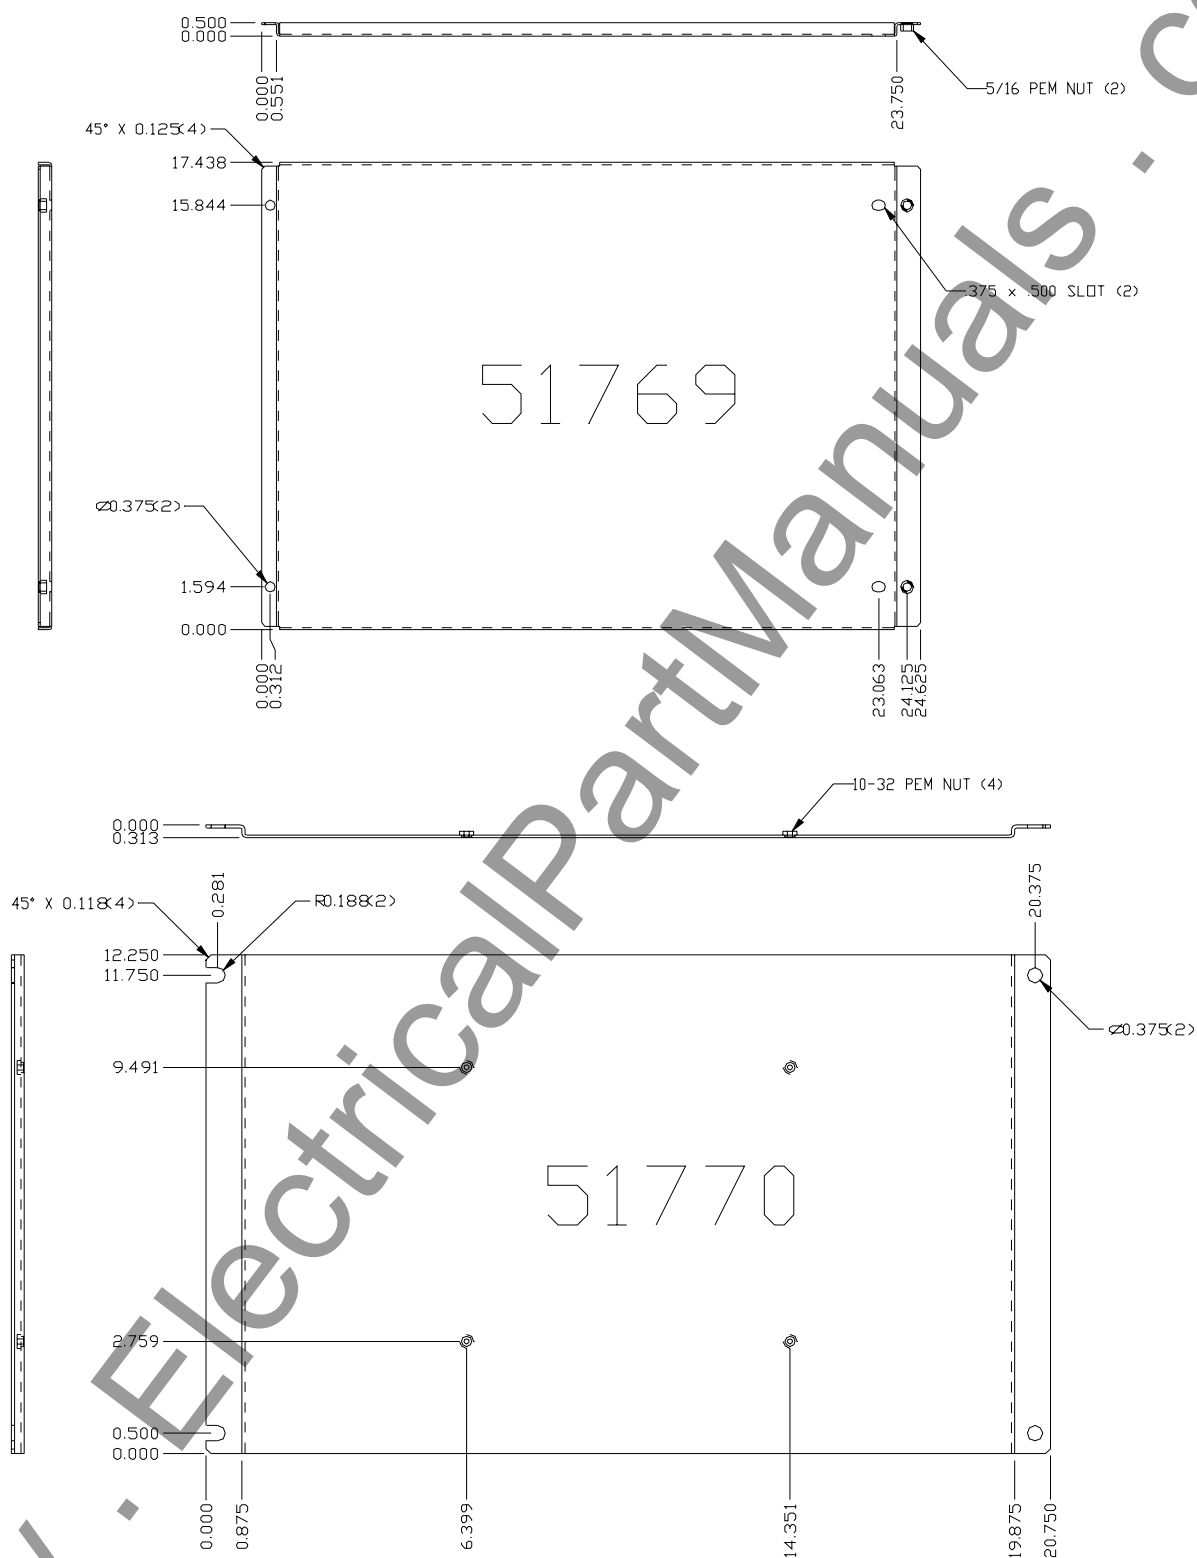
51769 and 51770 adapter mounting plate dimensions.
